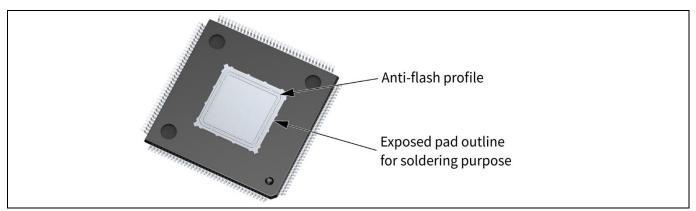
QFP with anti-flash profile in the exposed pad. The outer extension of the exposed pad including the anti-flash profile should be used as the reference for the PCB pad design.
